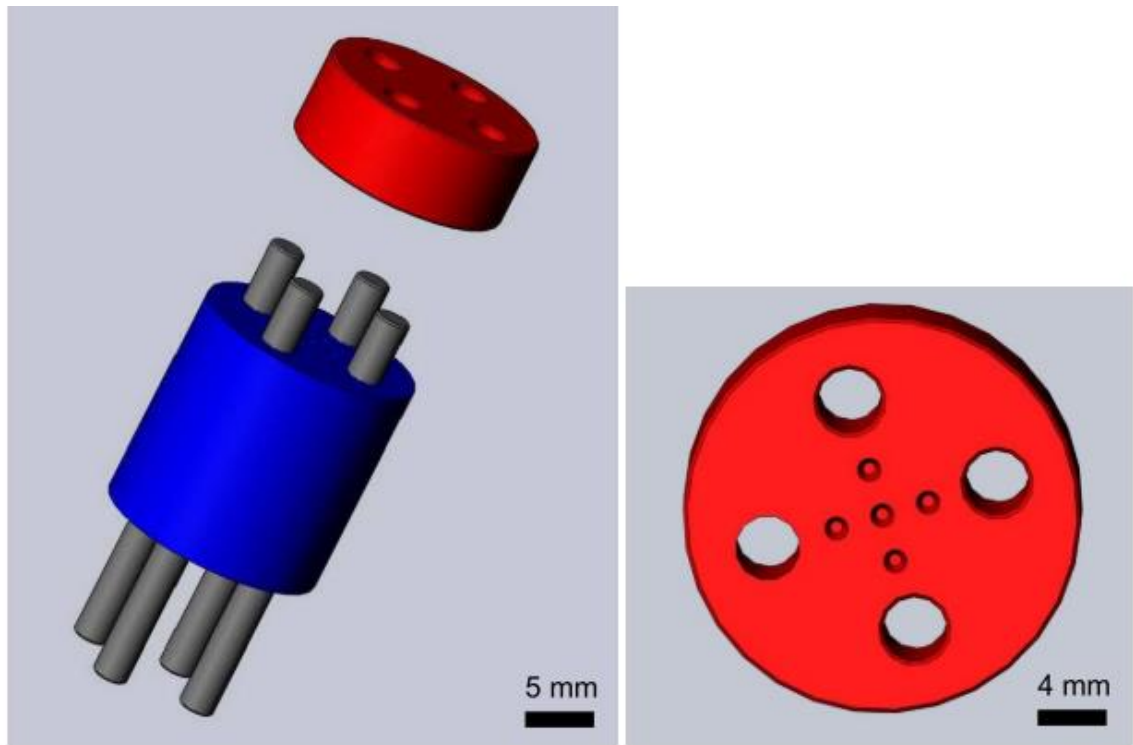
The custom made sealing device. The blue and red components are blocks of copper machined to accommodate the tubes and caps. Alignment between the main body (blue) and heat transfer block (red) is maintained by the 4 grey rods fixed within the main body. Image reproduced from [232].
